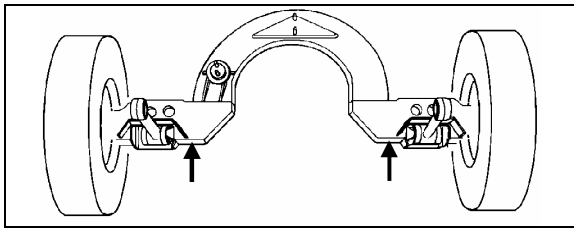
JACKING POINTS ON TAG AXLE 11023
